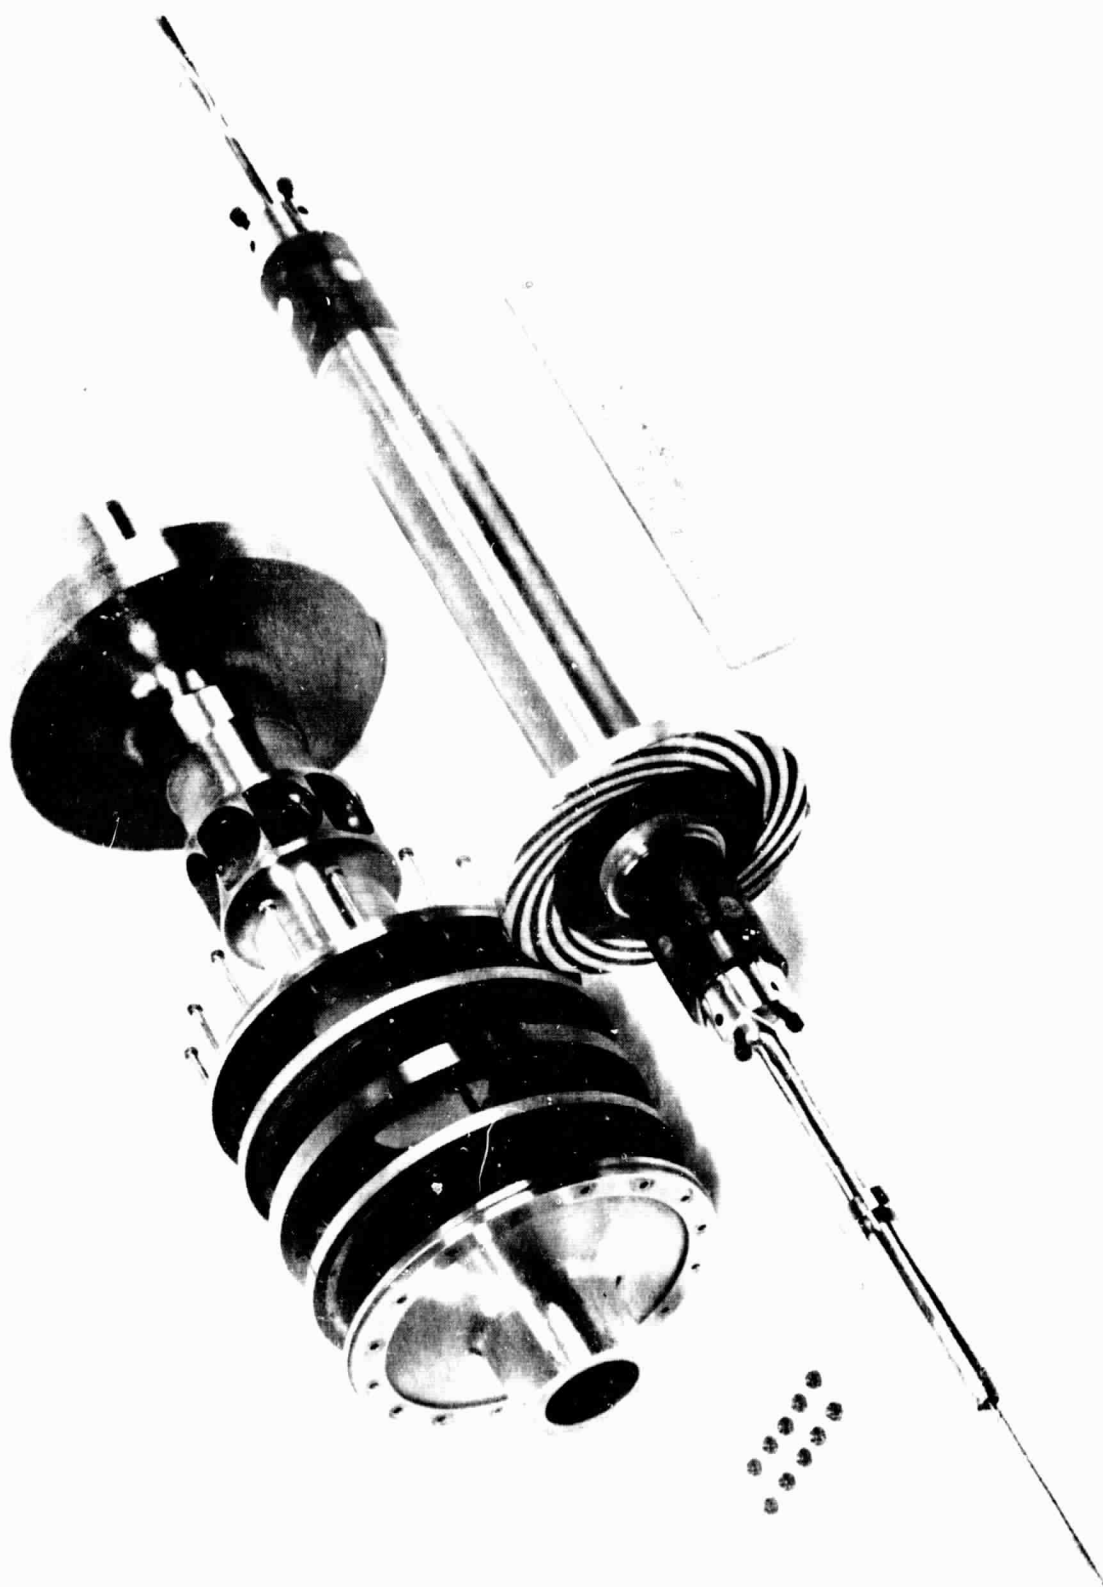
Rotor Parts and Shaft with Thrust Stator
